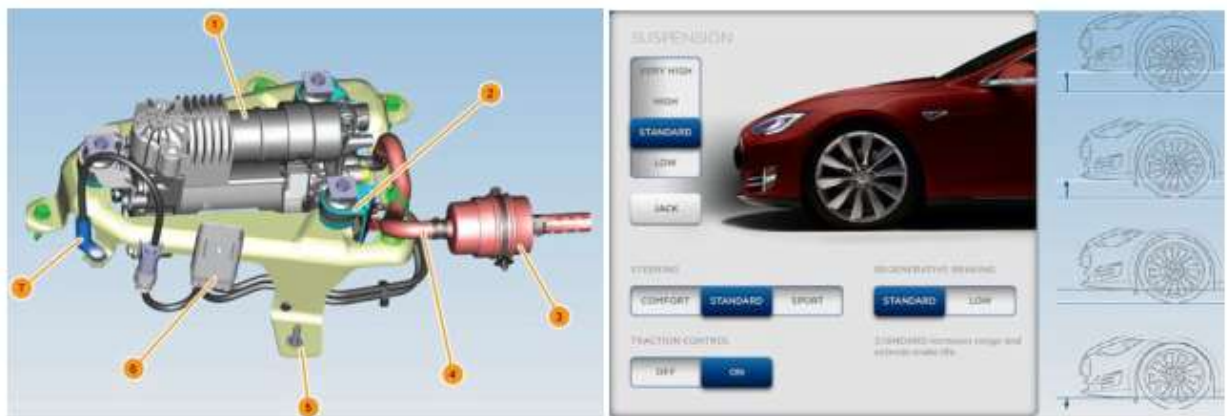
Compressor components and suspension height levels: 1 – air compressor; 2 – rubber assembly; 3 – air filter; 4 - suction hose; 5 – mounting bracket; 6 – electrical connector; 7 - ambient air temperature sensor
